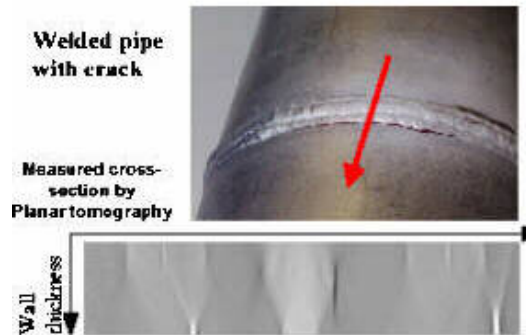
The test-object is a filled by water steel pipe with welding. The diameter of pipe is 140 mm and thickness is 13 mm.
